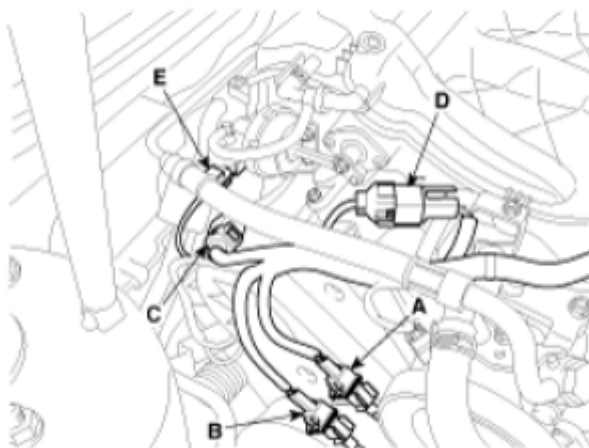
Identifying No. 1/No. 2 Knock Sensor Connectors, Injector Connector And Ignition Coil Harness
